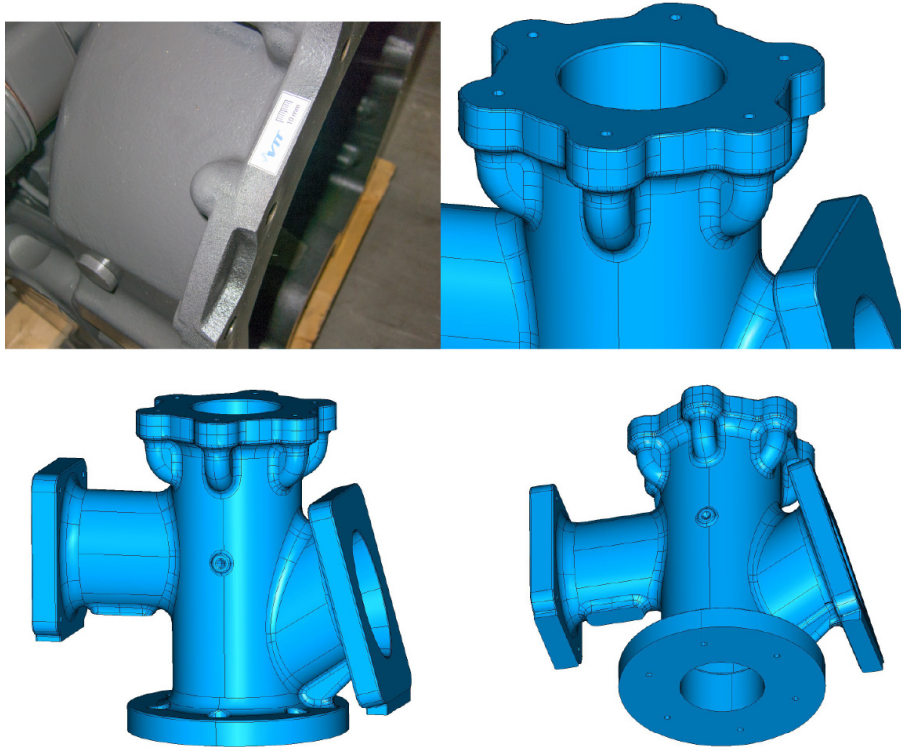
Alternative self-supporting design of the top flange. This is adapted for AM from the traditional casting designs. An example of such cast detail is shown on left.
